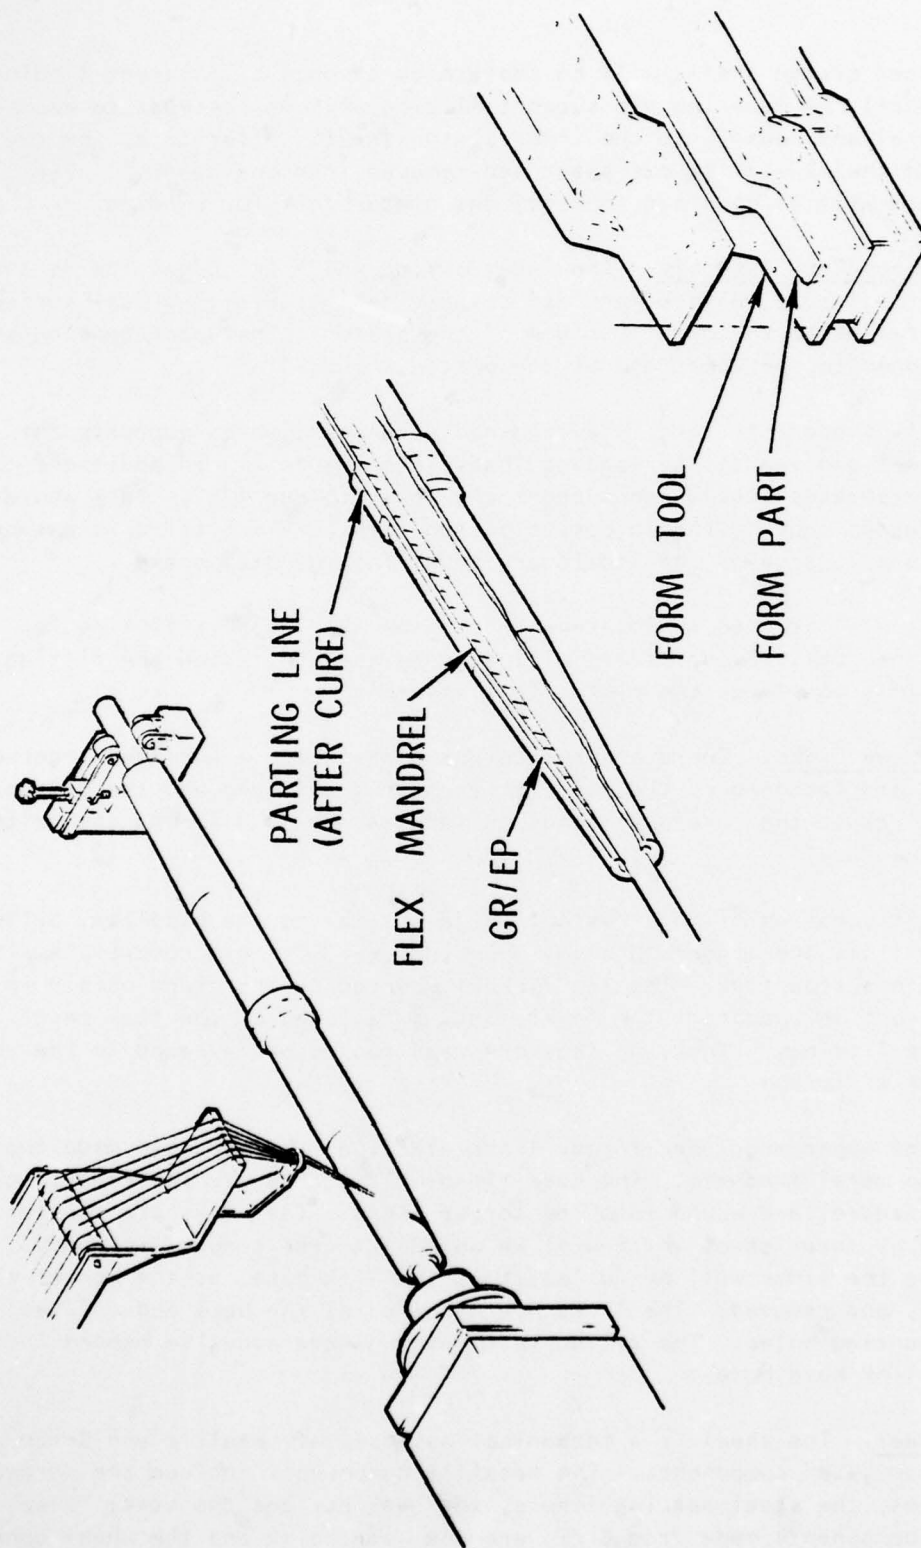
Piston/Fork Filament Winding and Forming Tooling
